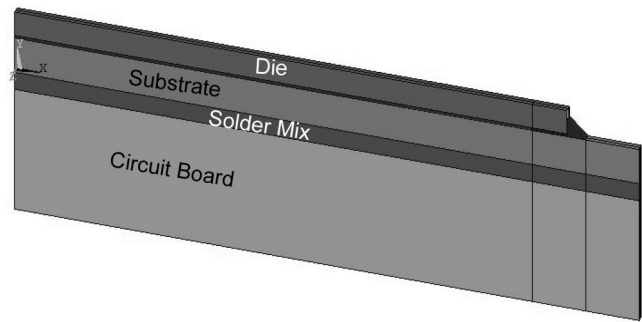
Schematic of flip chip cross-section with second level attachment. Vertical fillet crack located in upper right corner.
